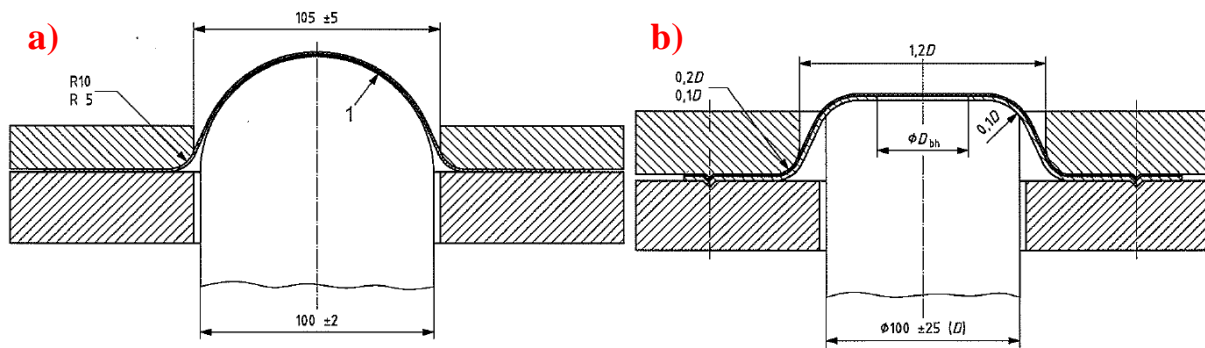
Cross sections of ISO12004-2 [25] tooling geometry for: a) Nakazima hemispherical punch, b) Marciniak flat punch. All dimensions are in millimeters.
